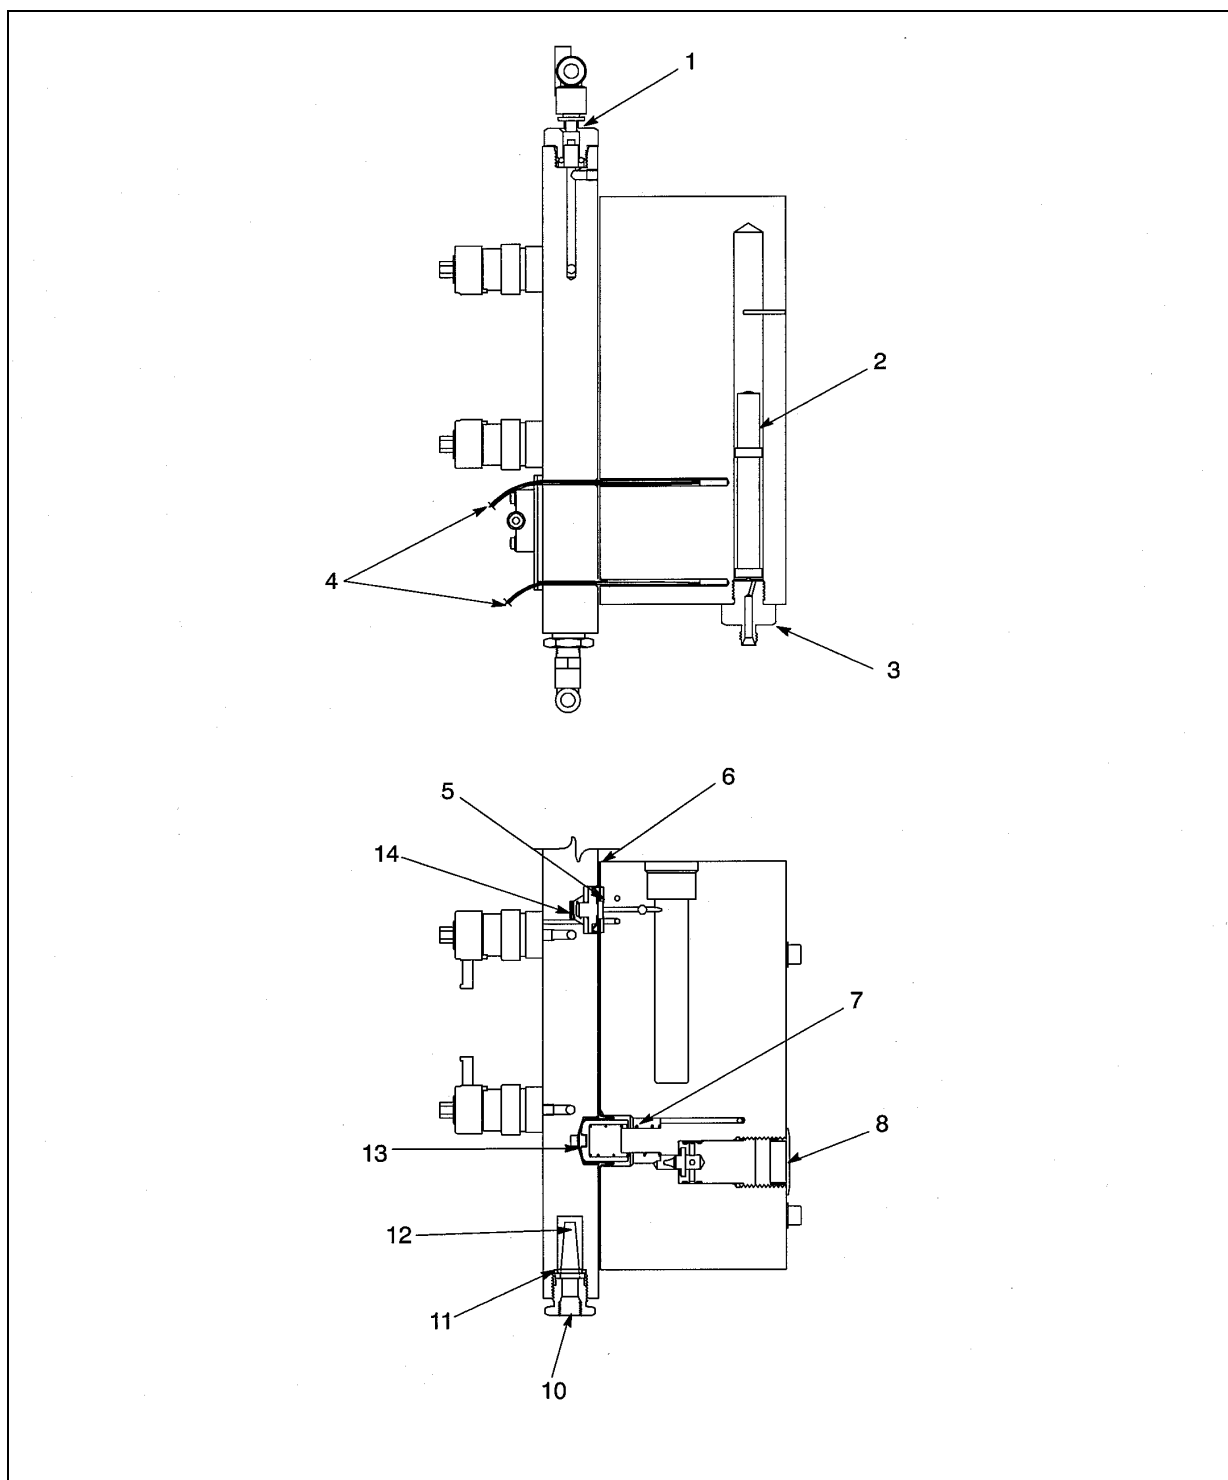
Air Manifold Components (Older Triumph Series Printers Only)
